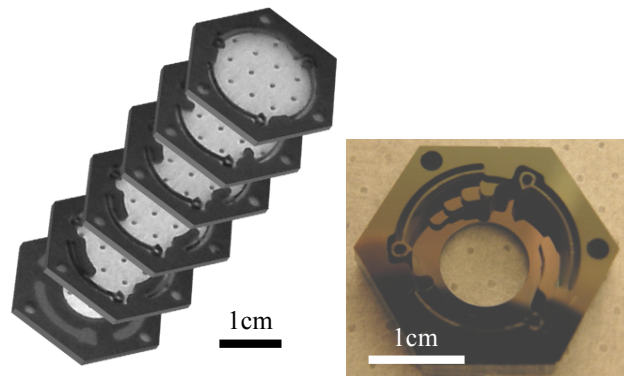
(left) exploded view of the six layers that compose the MEMS RPA housing; (right) completed housing.
